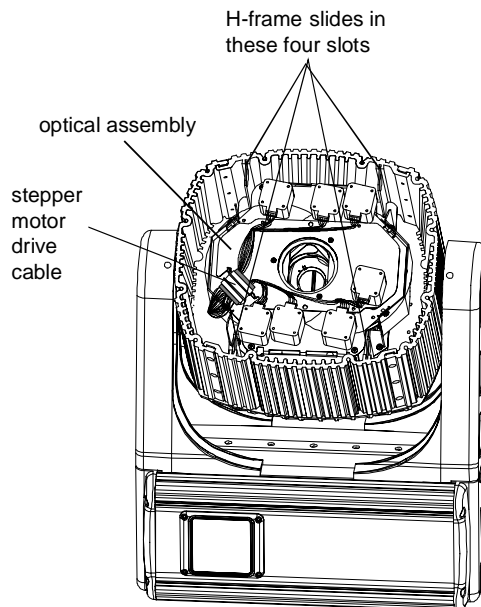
Disconnect stepper motor drive cable and remove optical assembly
